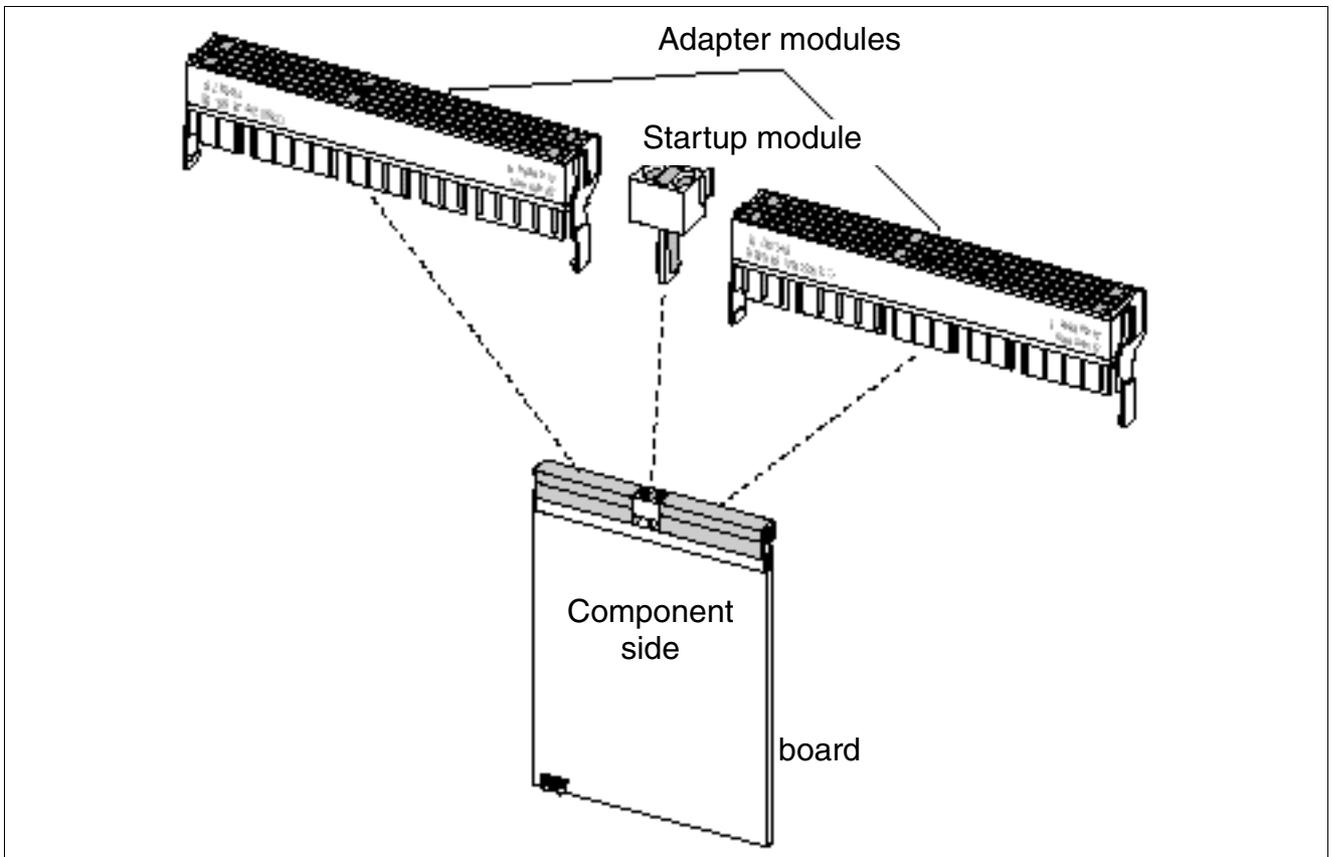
SIVAPAC-SIPAC Board Adapter
